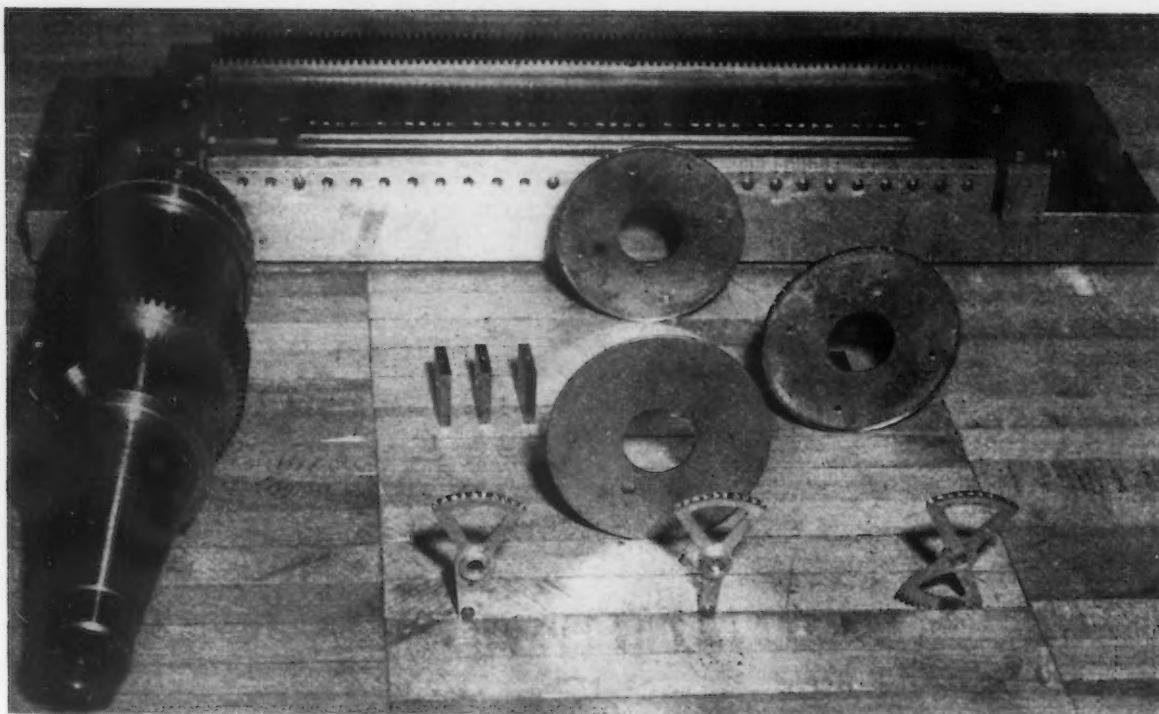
Characters are rolled on wheels and sectors such as shown here. Also shown is the spindle setup with the pinion, blank and holders. In the background is a fixture that holds a set of die blocks, three of which are shown separately to the left of a blank typical of those on which characters are rolled.
